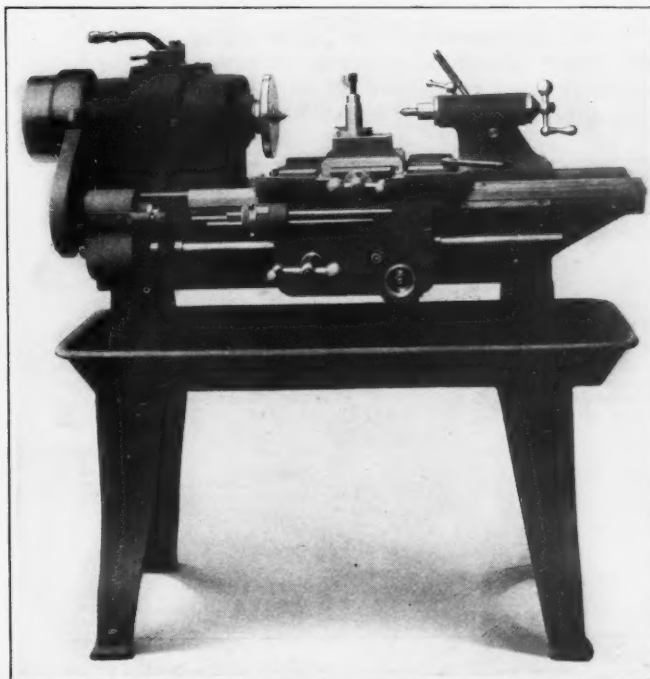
"Short-cut" Lathe built by Ogden R. Adams
